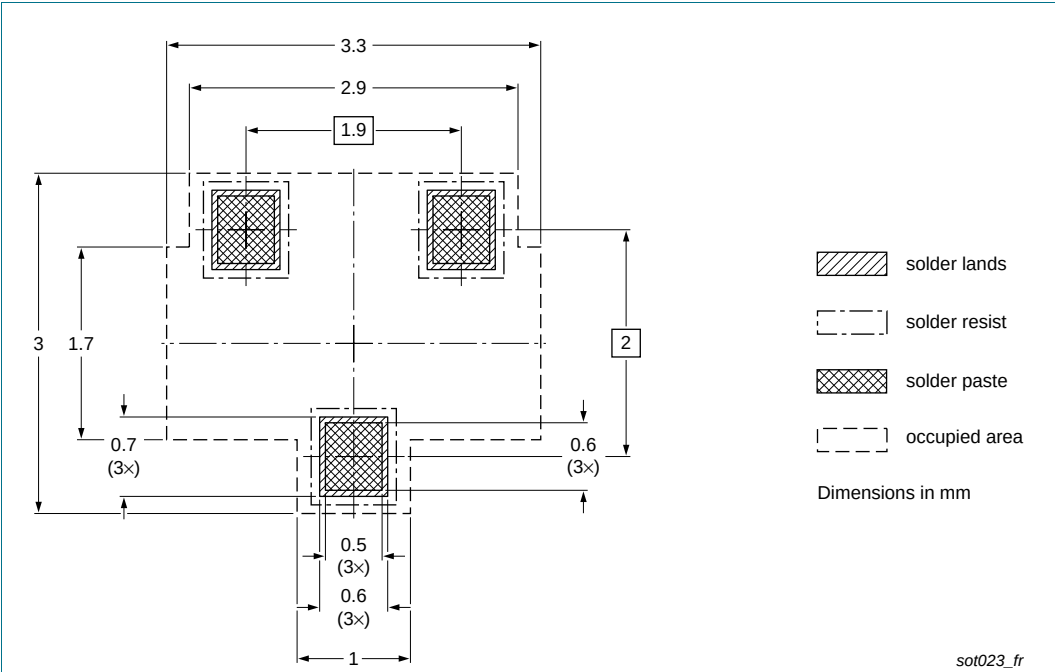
Reflow soldering footprint SOT23 (TO-236AB)
